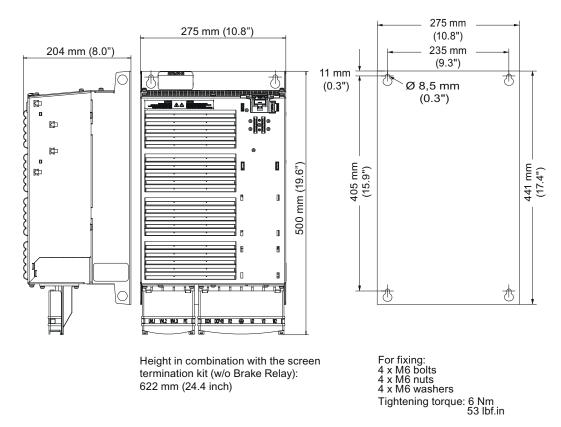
Dimensions and drill pattern for Power Module PM240, FSE, IP20, unfiltered
